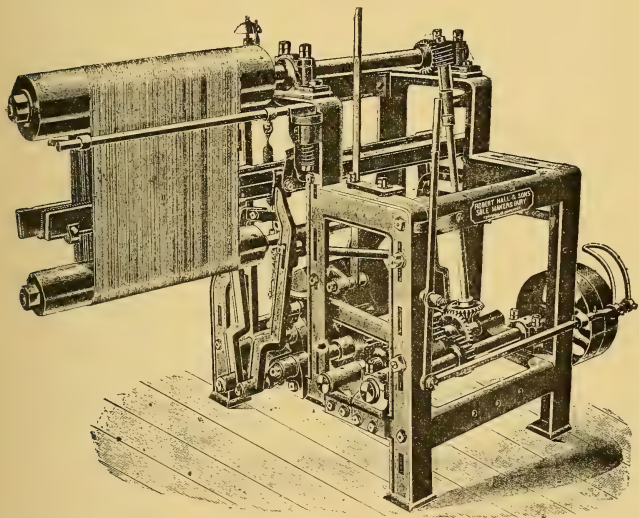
HANK SHAKING AND BRUSHING MACHINE.
